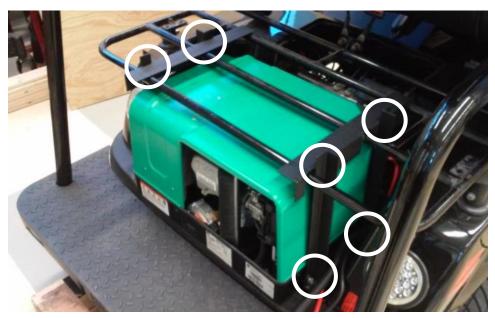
Photograph of generator mount. The locations of the bolts are circled. There are two bolts on the bottom left side of the generator that have not been circled.
